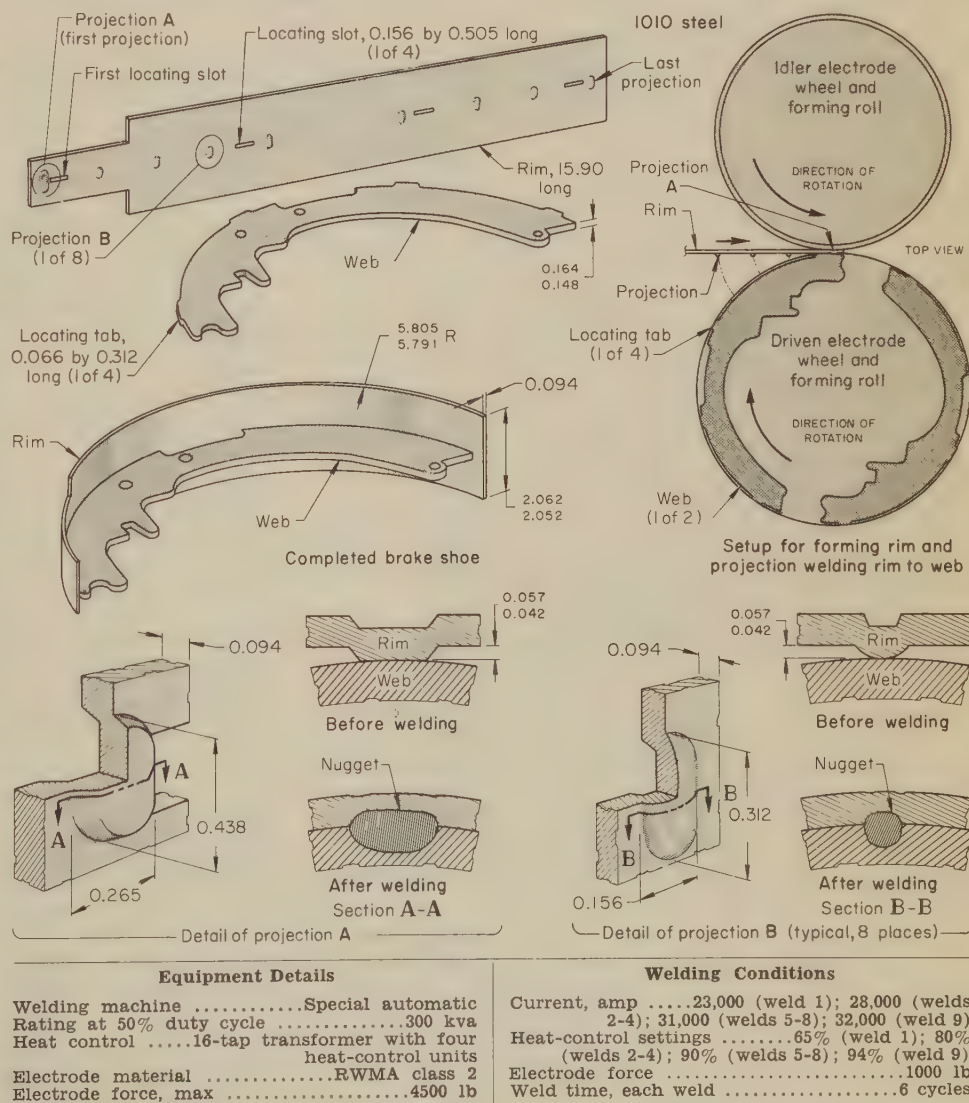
Brake-shoe assembly that was roll formed and joined with nine projection welds in a special high-speed machine, using progressive increases in welding current to compensate for shunting and heat build-up during welding (Example 391)
